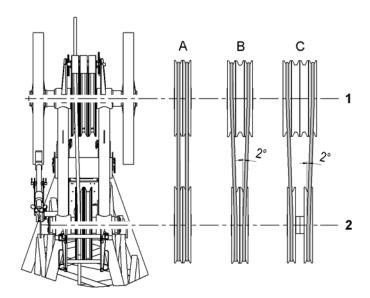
Run of the rope when two ropes pass over the jib head section
